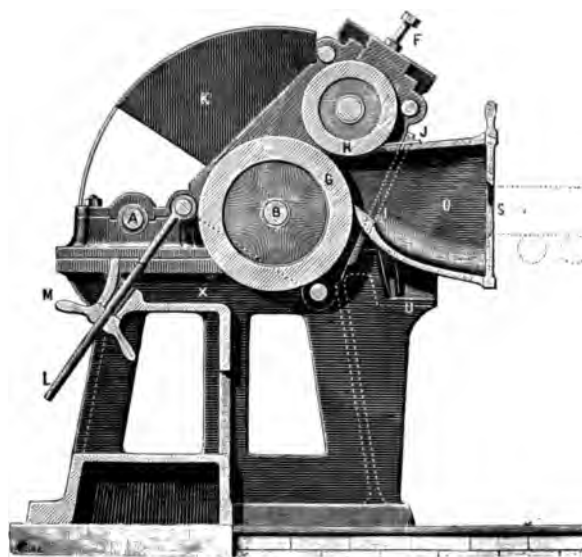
Section of a Cylinder Expression Machine (Joly).
